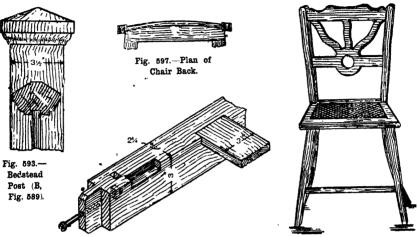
Detail of Bedstead Construction (A, Fig. 589).
